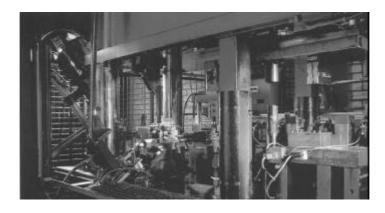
Transfer Press with Assembly and Threading Attachment
